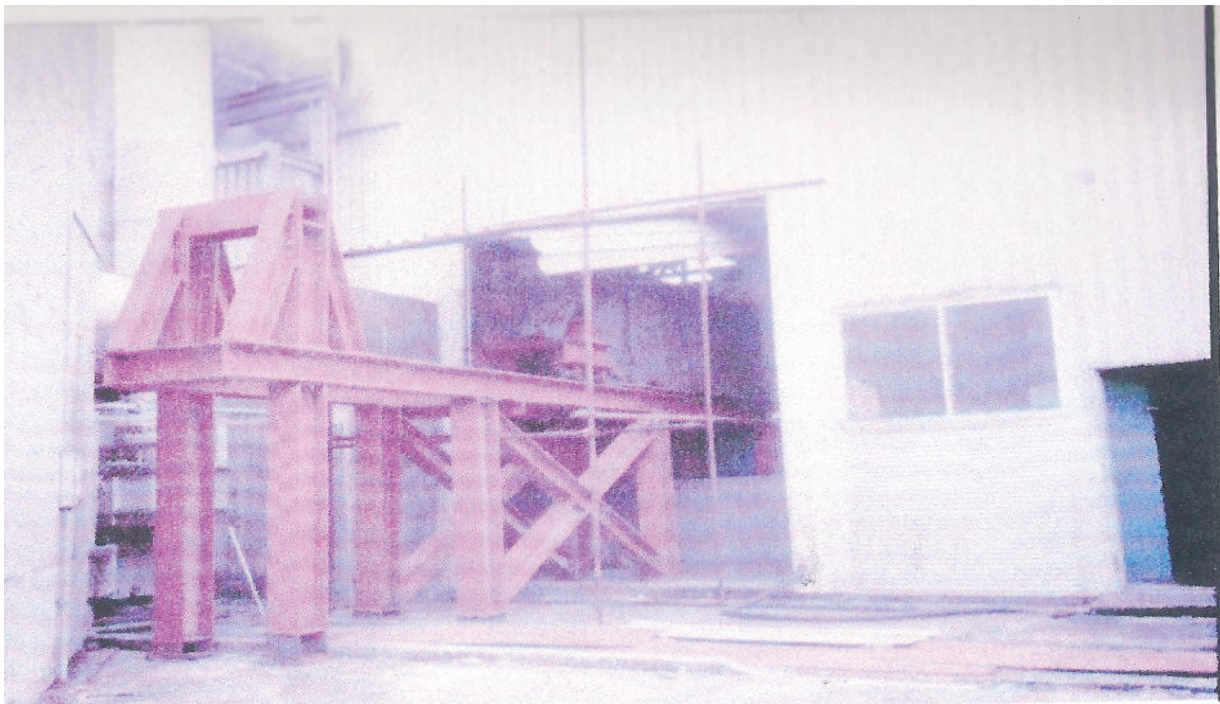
As-built photo of the shaft-sleeve puller mechanism.
